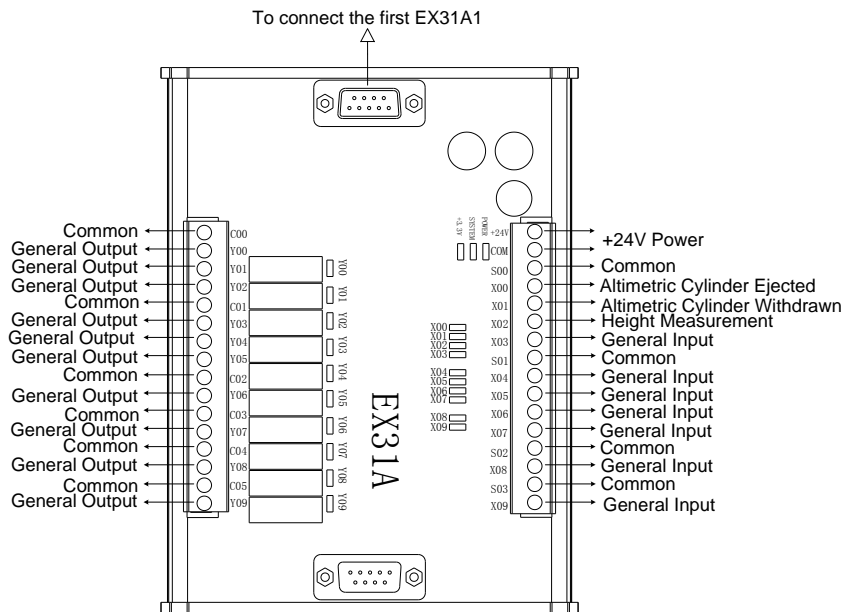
Wiring of the second EX31A1 in four axes waterjet cutting
